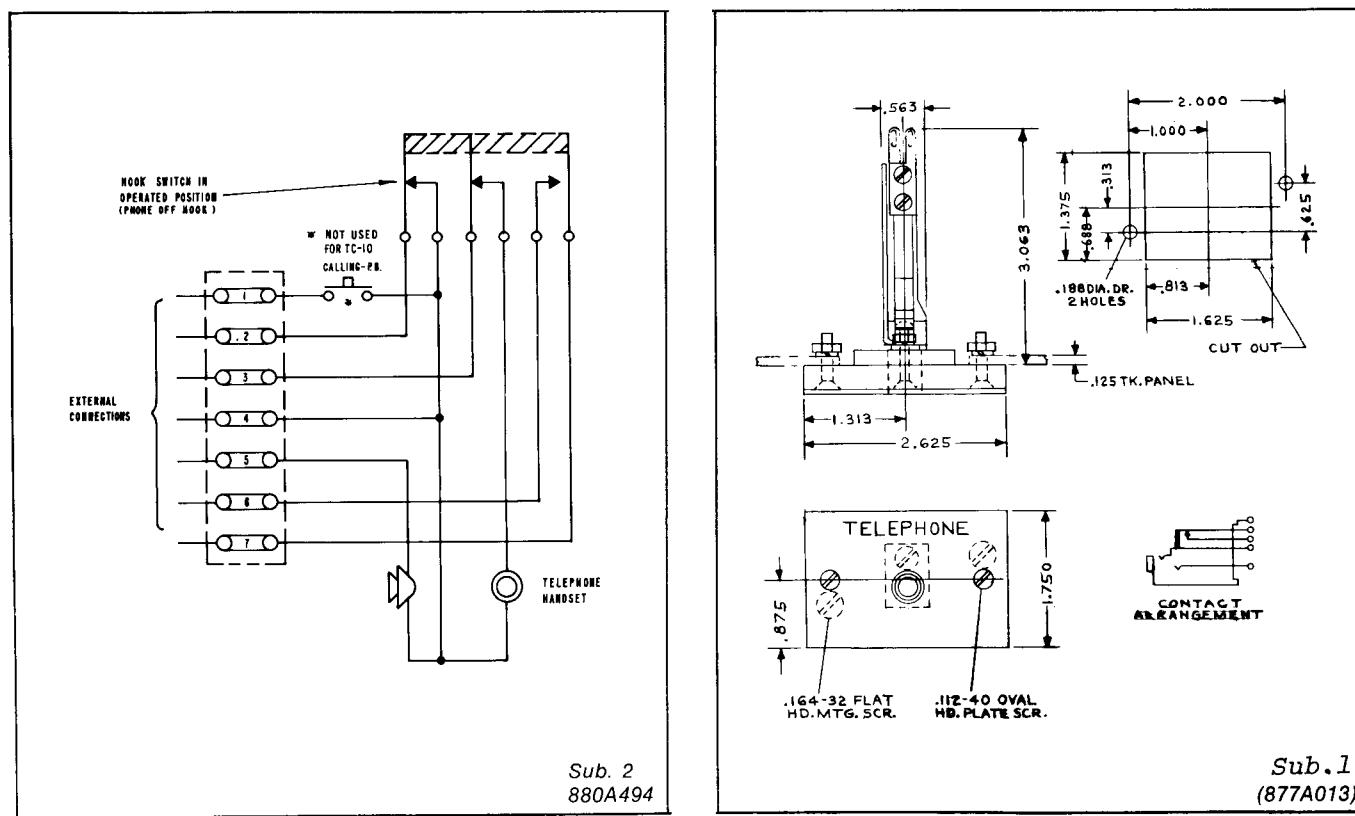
Remote Hookswitch Assembly Internal Schematic
